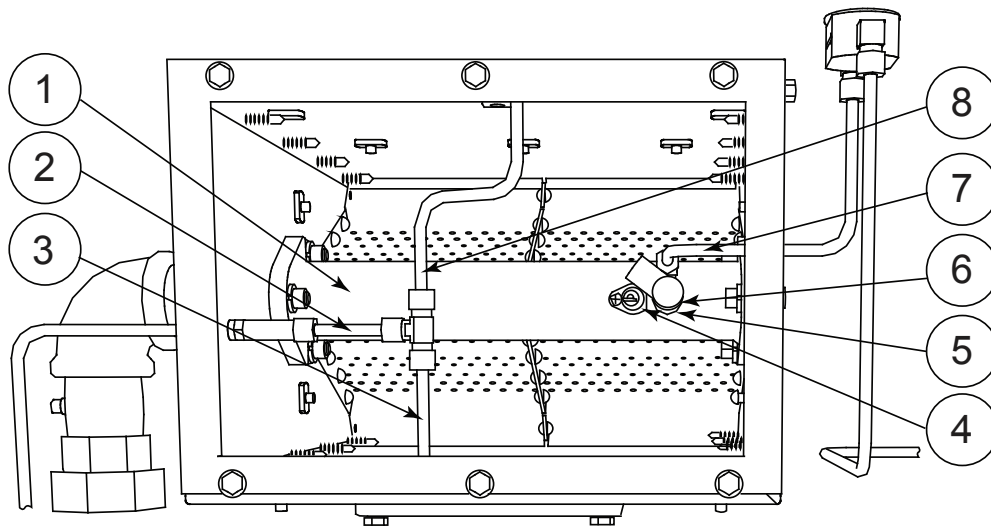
A - V2 - Inside View of Burner Housing Rear - 120V Burner
